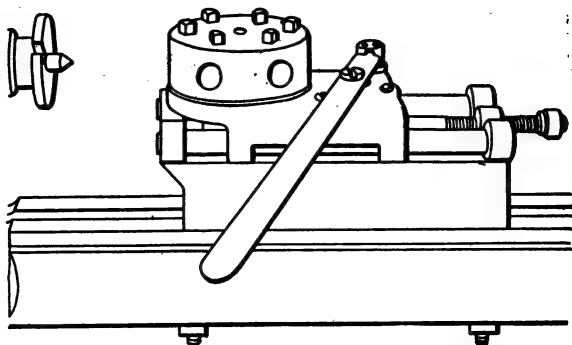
A turret for a bench lathe with which six different operations can be performed.
